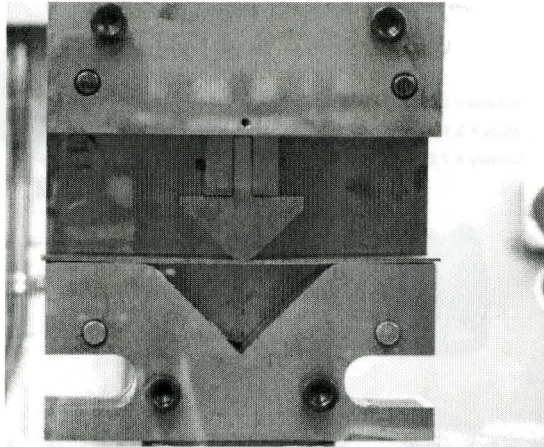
Placement of bend specimen in the V-die showing initial deflection due to the weight of the punch.
